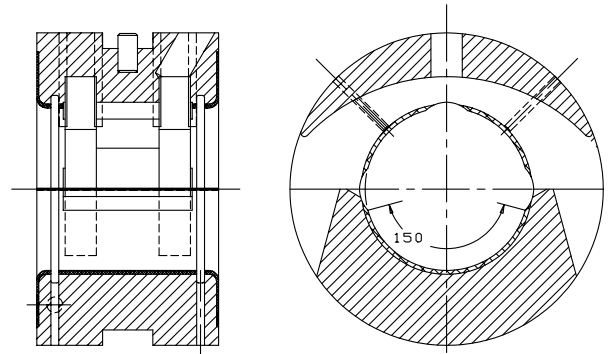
Partial Arc Cylindrical Sleeve Bearing Section
